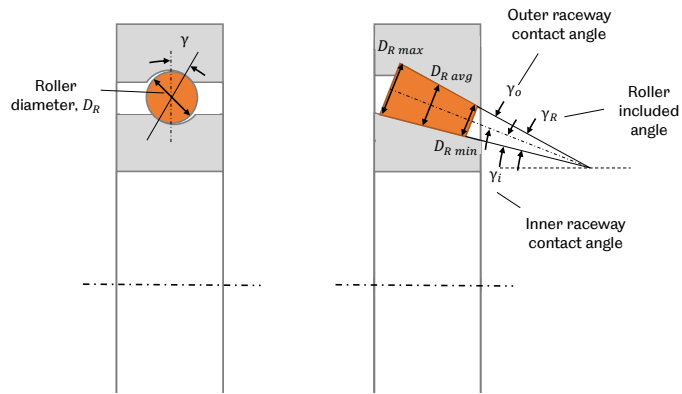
Bearing contact angles for (a) ball bearings and (b) tapered roller bearings.
